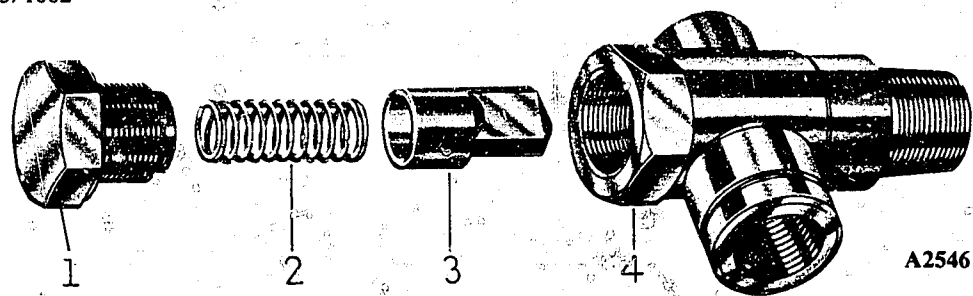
Exploded View of Steel Housing Type Assembly.
